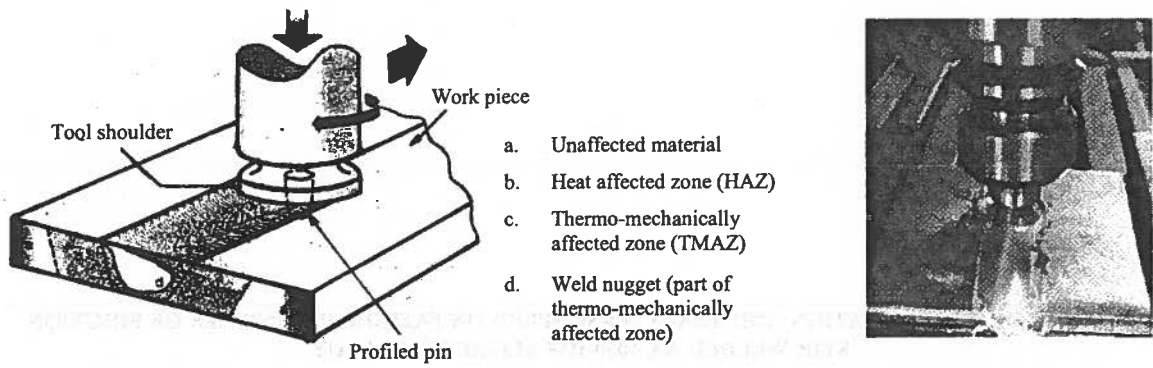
a) Schematic illustration of friction stir welding process and microstructure of heat affected zone [4], b) FSW application on conventional milling machine
